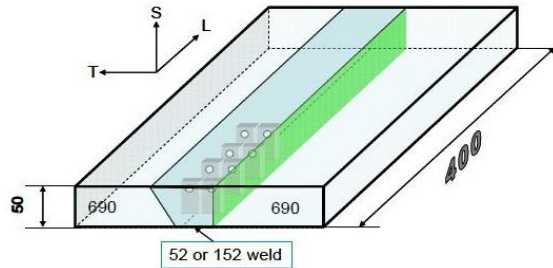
Weld design for the CIEMAT samples: two Alloy 690 plates welded with a half-V groove. The weld metal is either Inconel 52 or 152, and the welding technique is either GTAW or SMAW, respectively.
